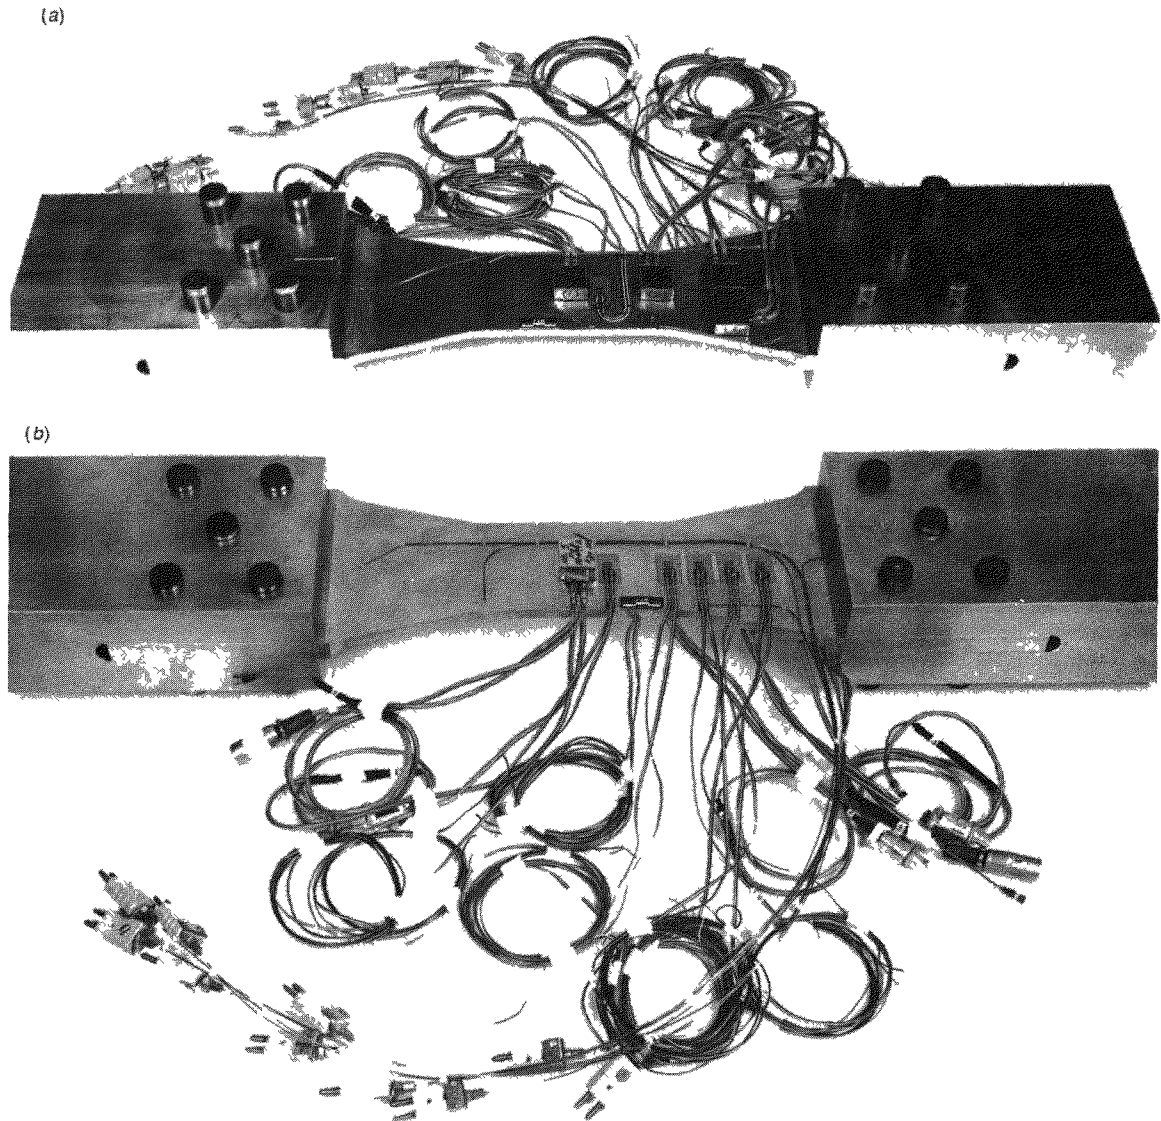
Type 316/16-8-2 weldment specimen WPCT-5 instrumented for testing.
